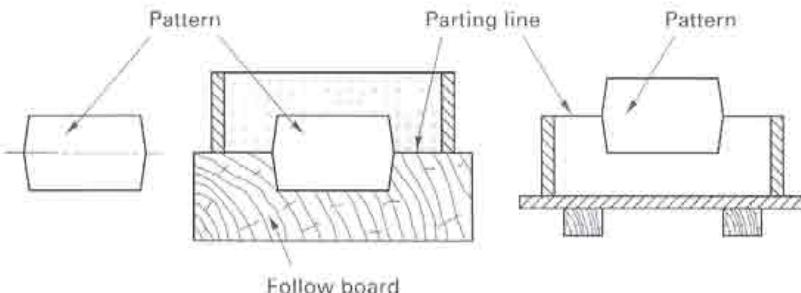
Method of using a follow board to position a single-piece pattern and locate a parting surface. The final figure shows the flask of the previous operation (the drag segment) inverted in preparation for construction of the upper portion of the mold (cope segment).
